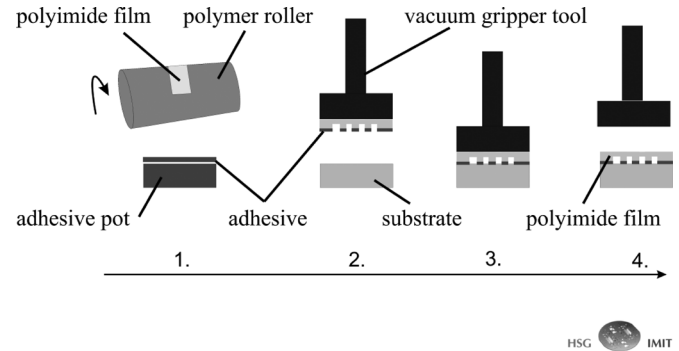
Schematic illustration of the adhesive roller transfer process. 1. Picking up adhesive out of a pot directly on the polyimide film using a polymer roller. 2. Picking the coated polyimide film using a vacuum gripper tool. 3. Alignment on the substrate. 4. Finally removing the gripper tool.
